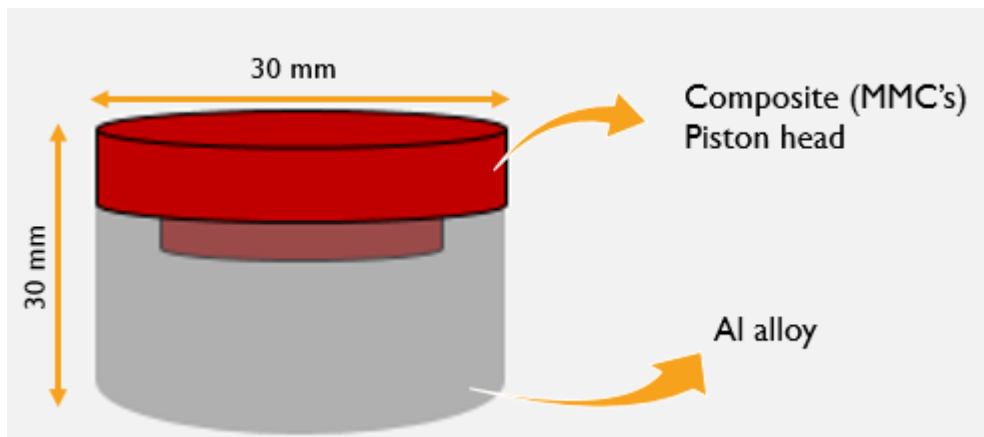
The schematic view of piston produced after squeeze casting operation.
